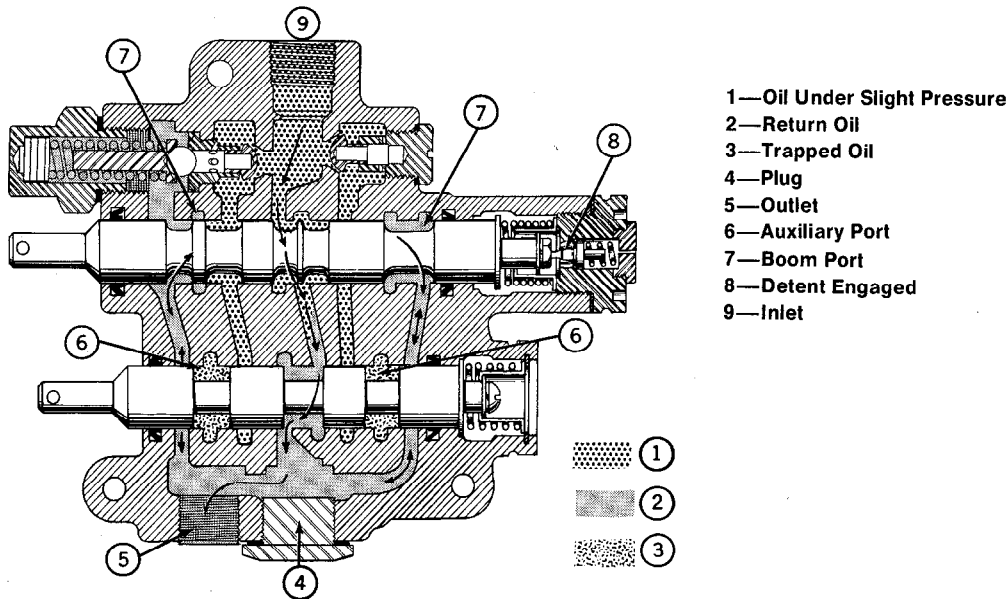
Control Valve in Float Position (2-spool valve shown)
